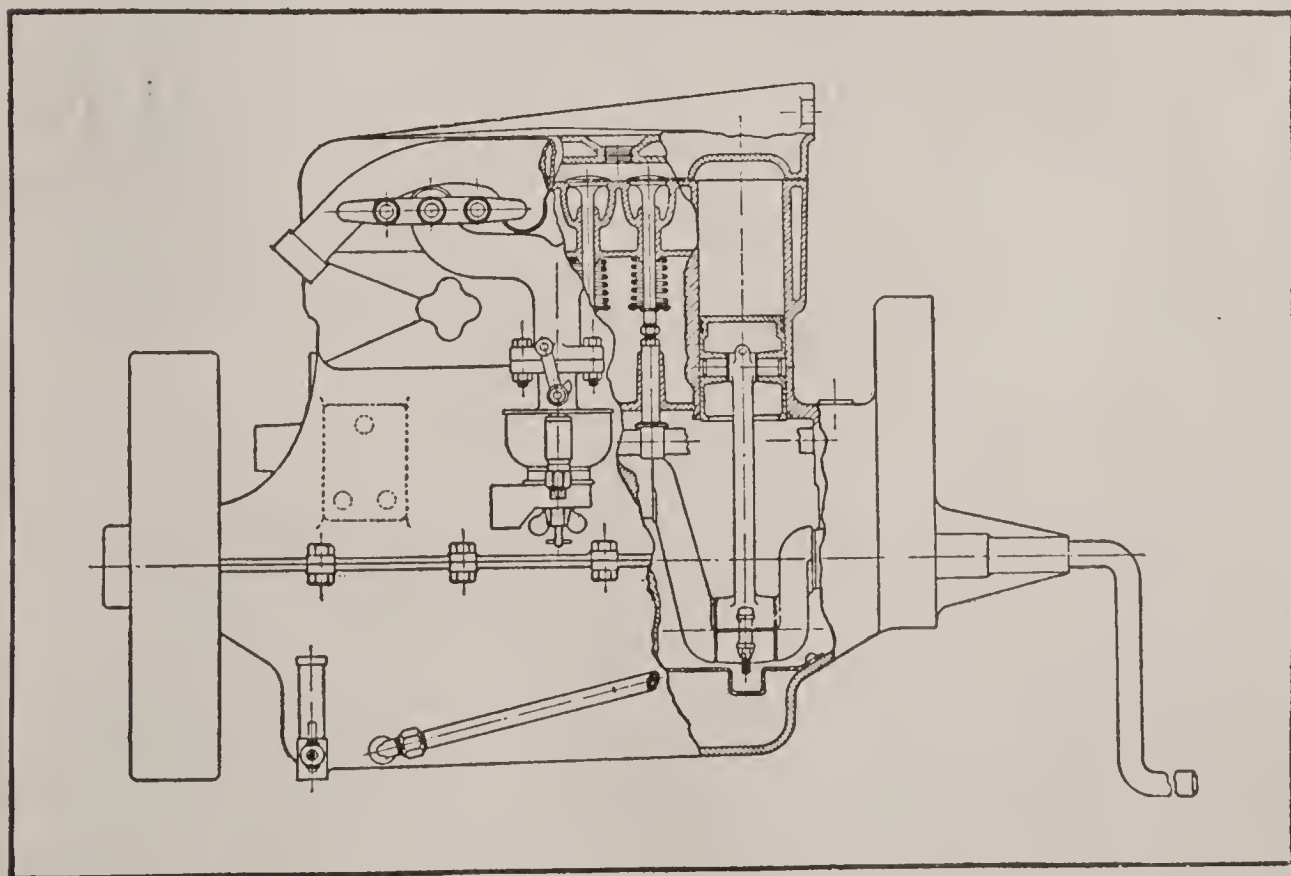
Sectional View of Typical Four Cylinder Water Cooled Power Plant for Light Cars.
